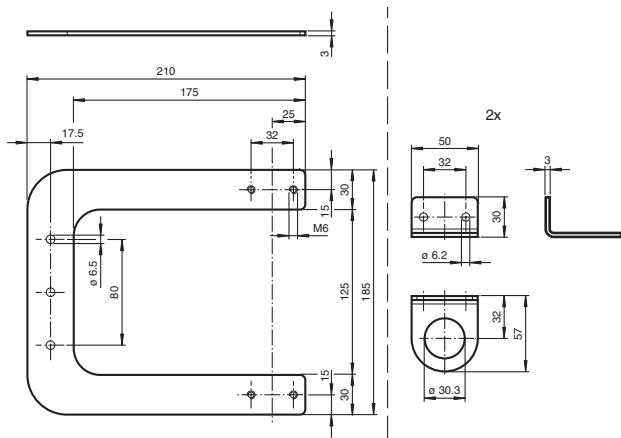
Dimensions - Installation device MH-UDB-02
